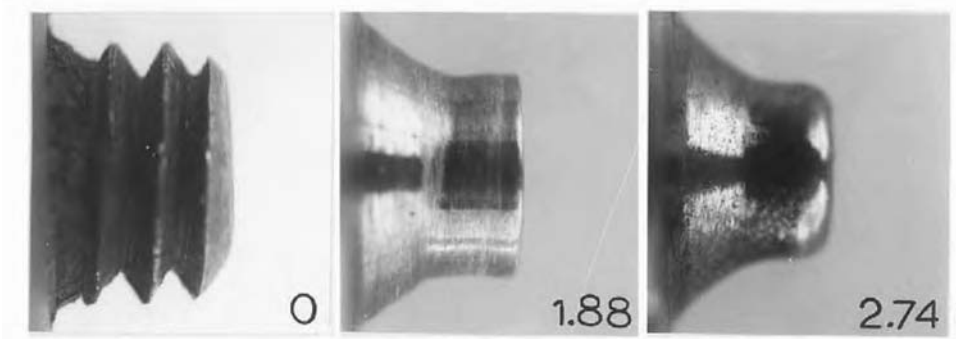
Self-optimizing probe geometry resulting from wear in friction stir welding of 6061 + 20% Al_2O_3 with tool steel pin tool. Source: Ref 12
